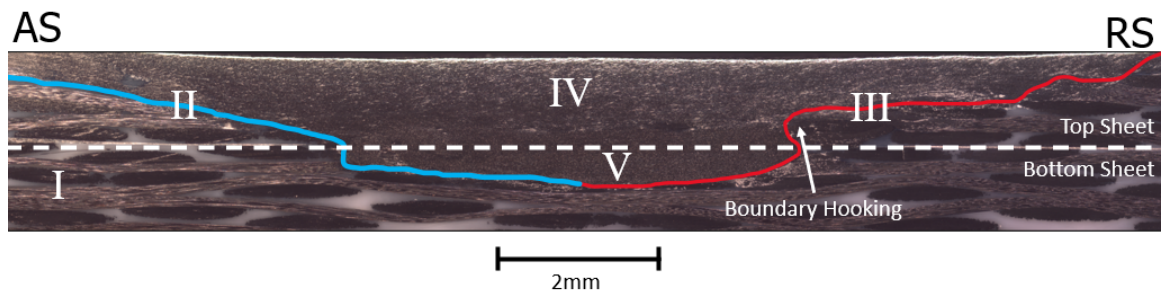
1000 RPM, 30.5 mm/min weld specimen cross section
